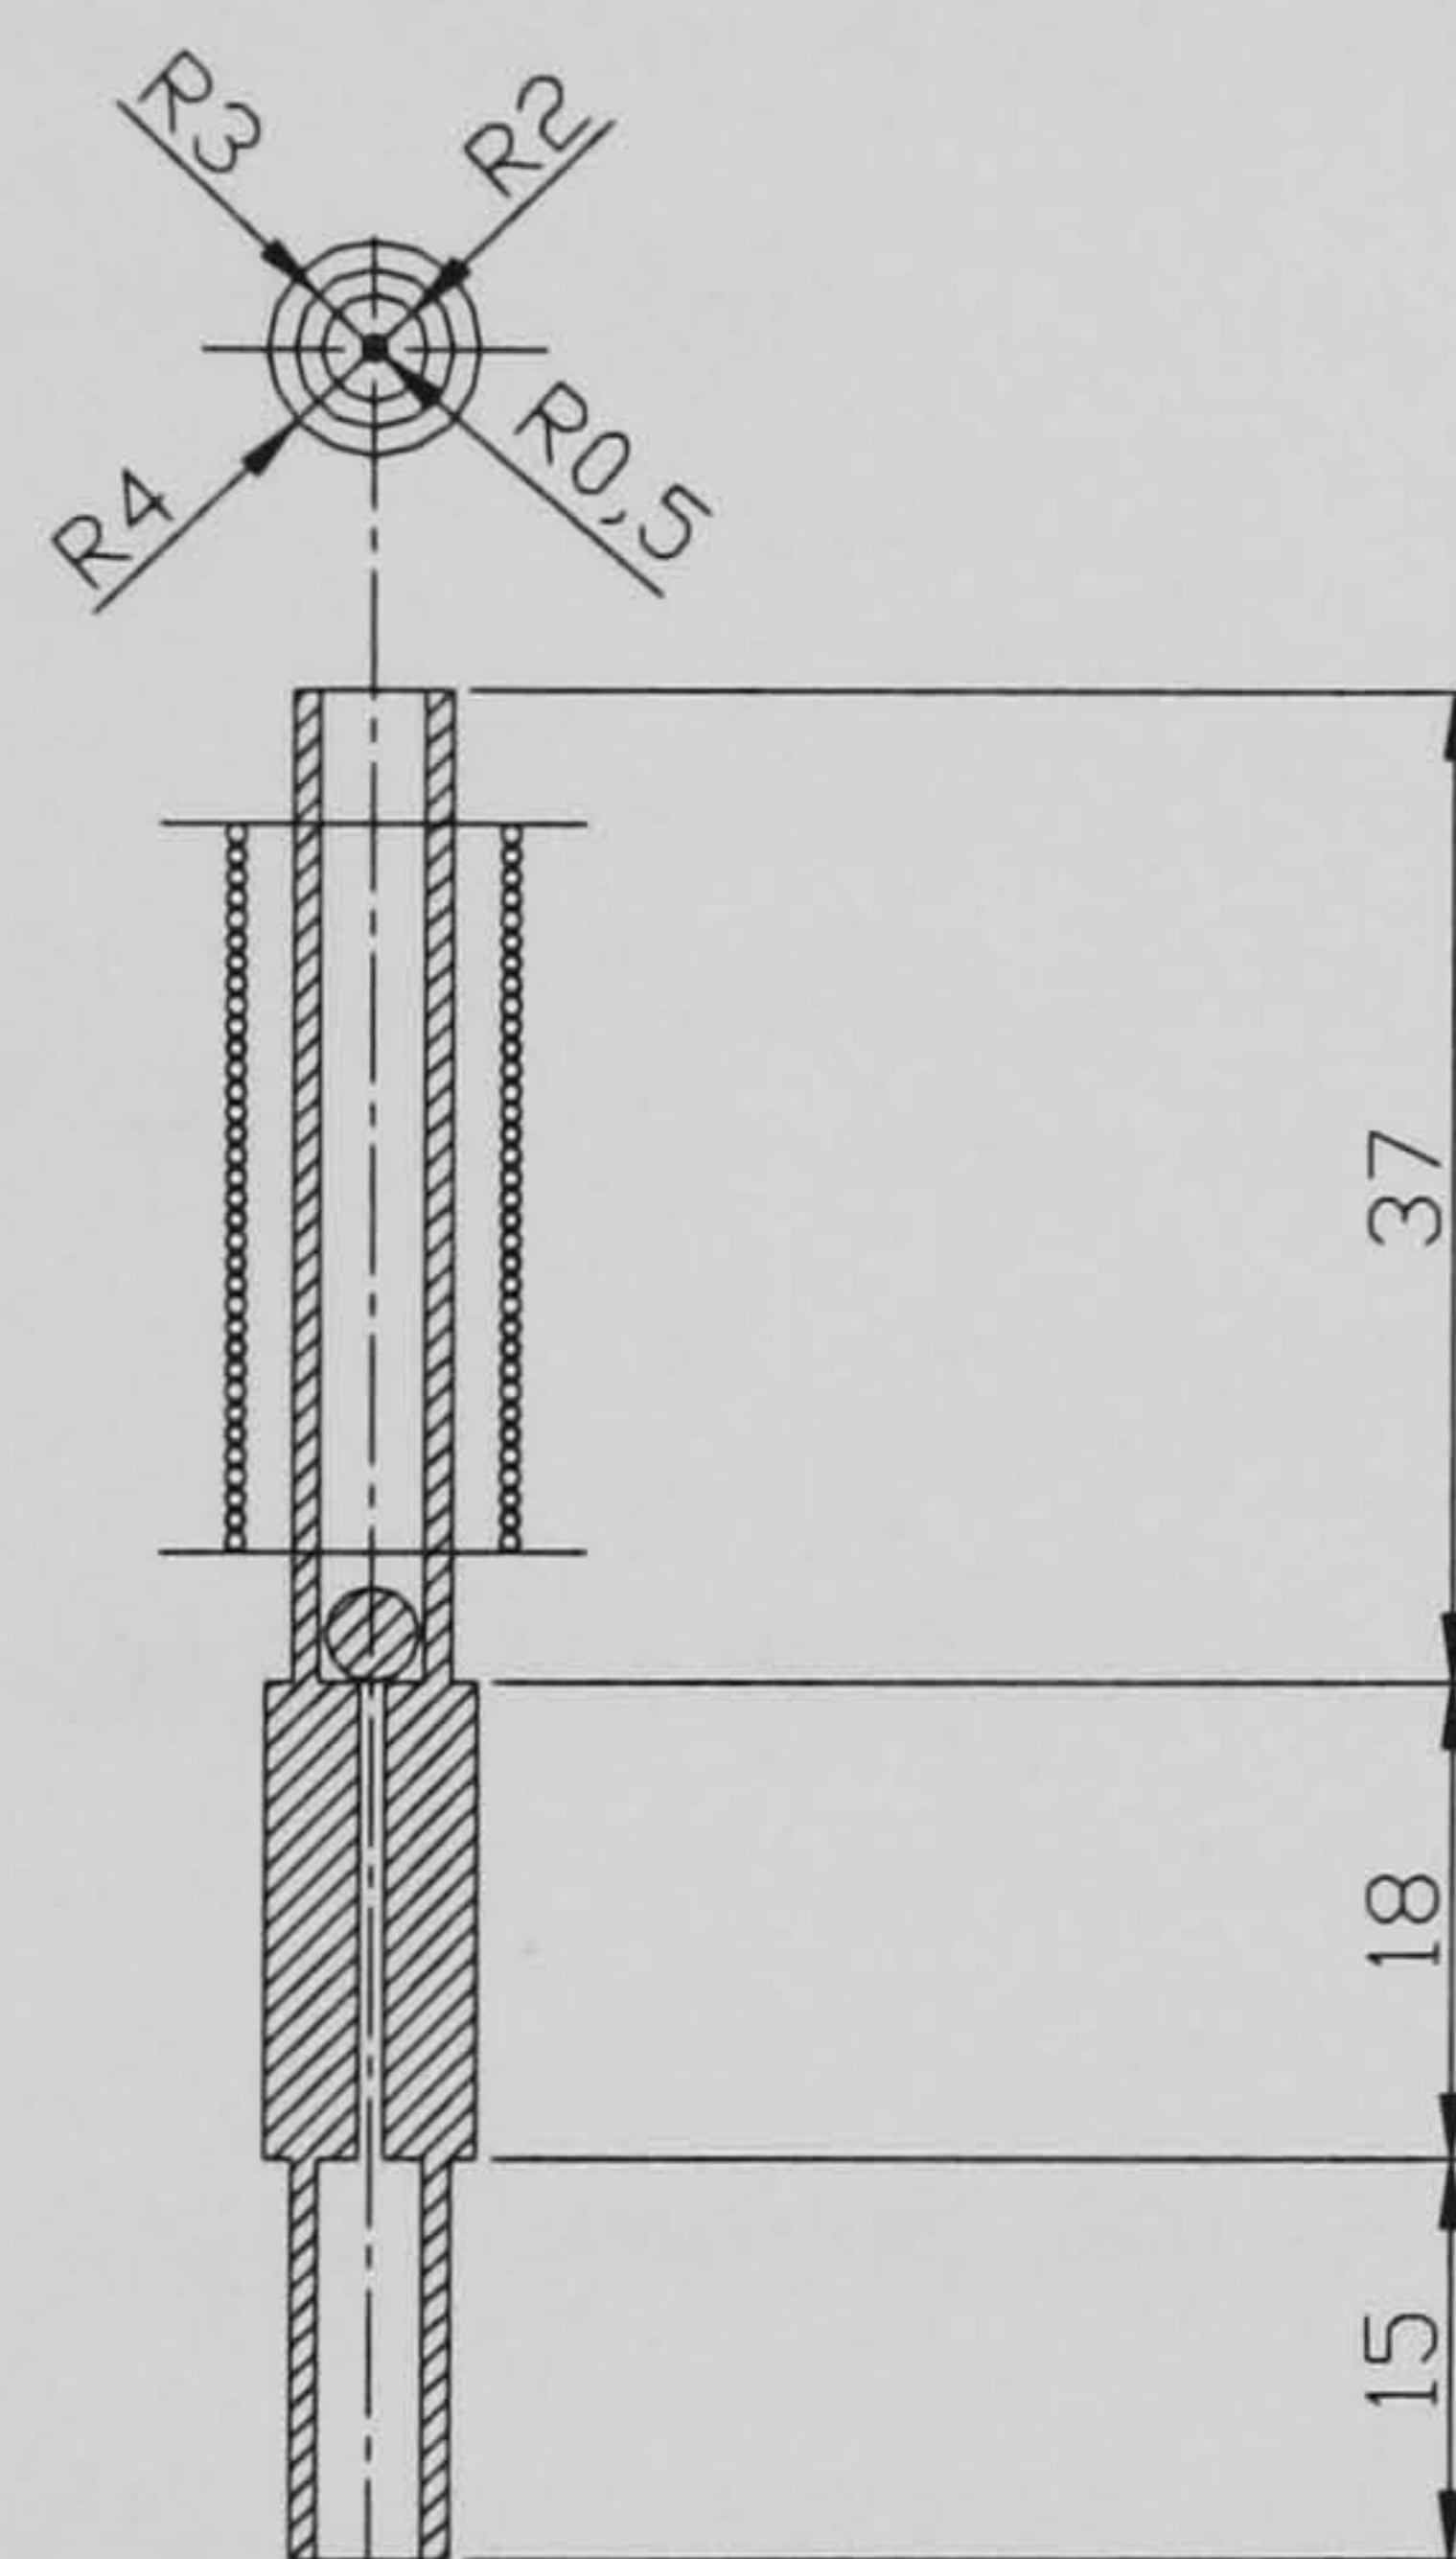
Detail design of solenoid valve (all dimensions in mm)
